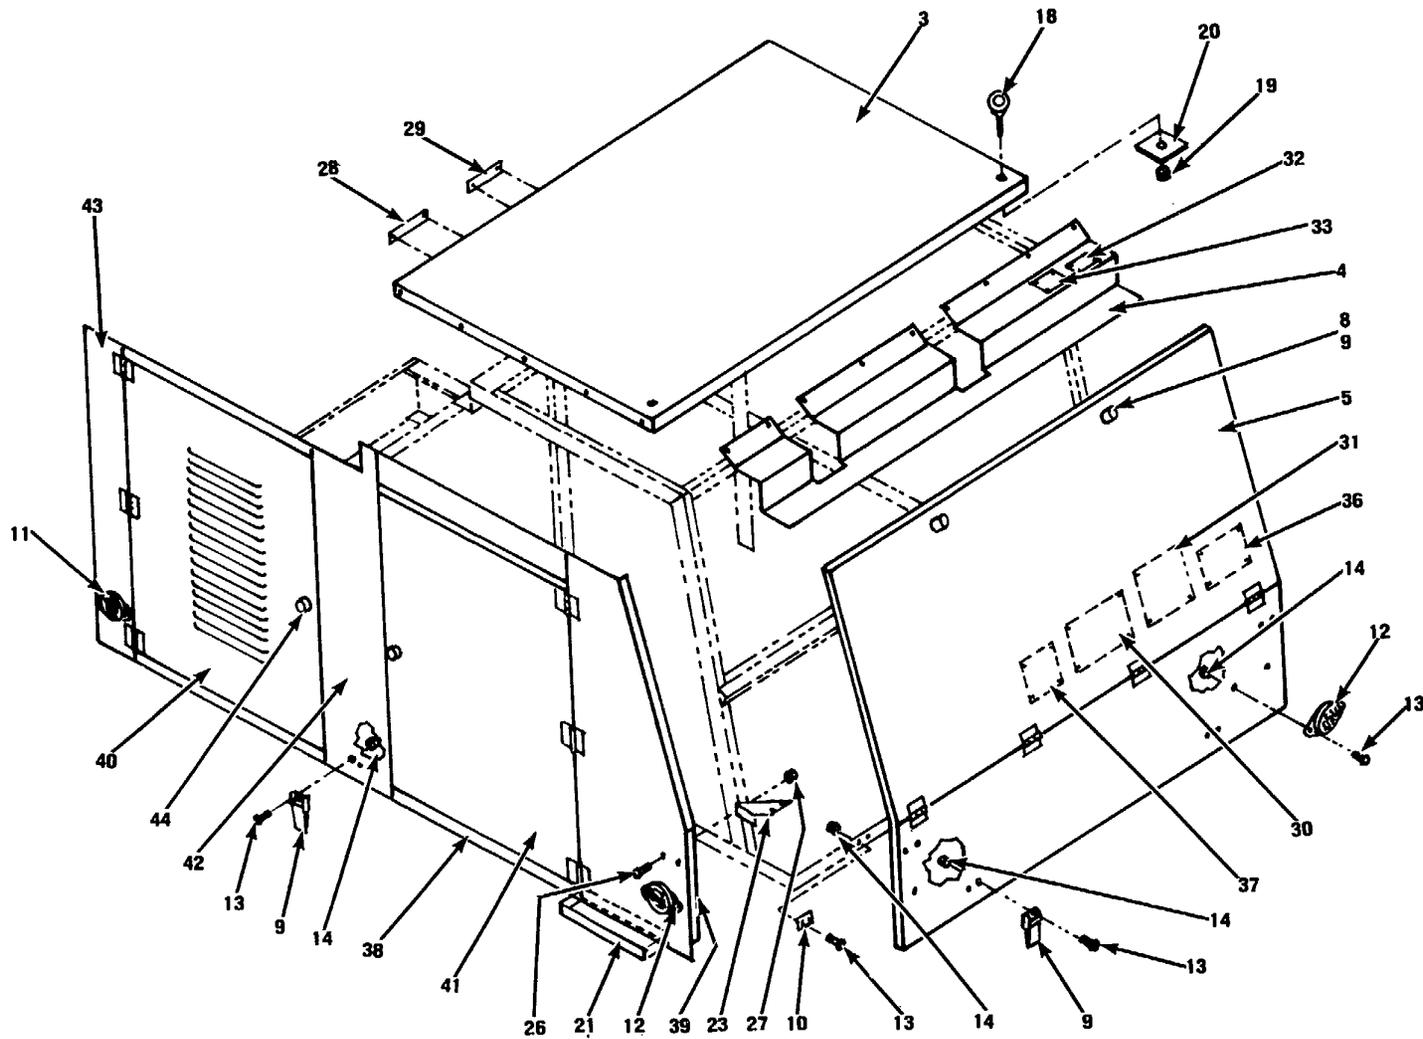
External Housing Assembly (Sheet 2 of 2).
